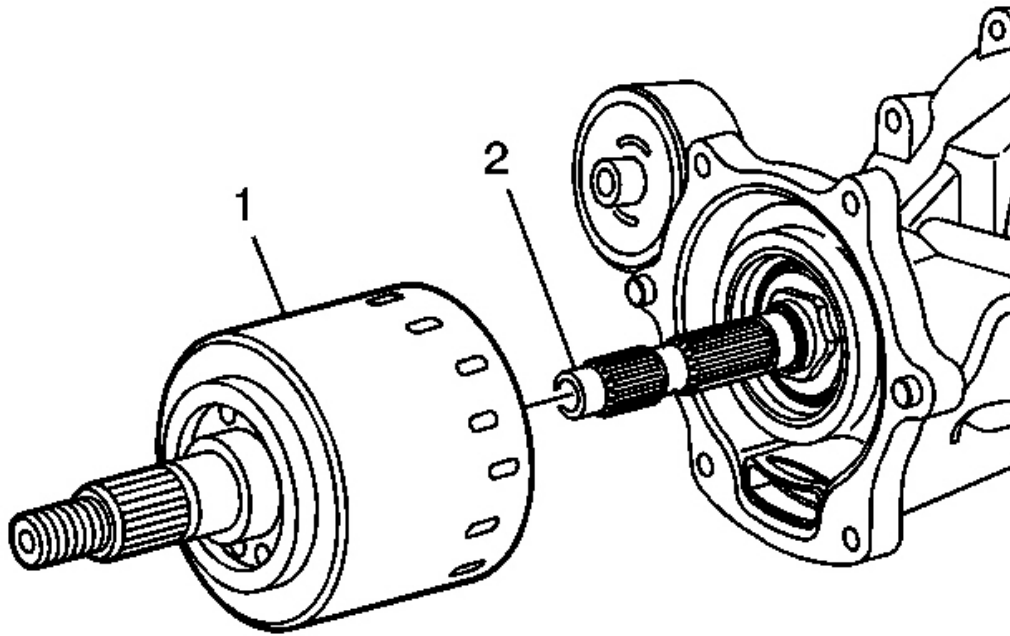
Installing Clutch Drum On The Pinion Shaft
